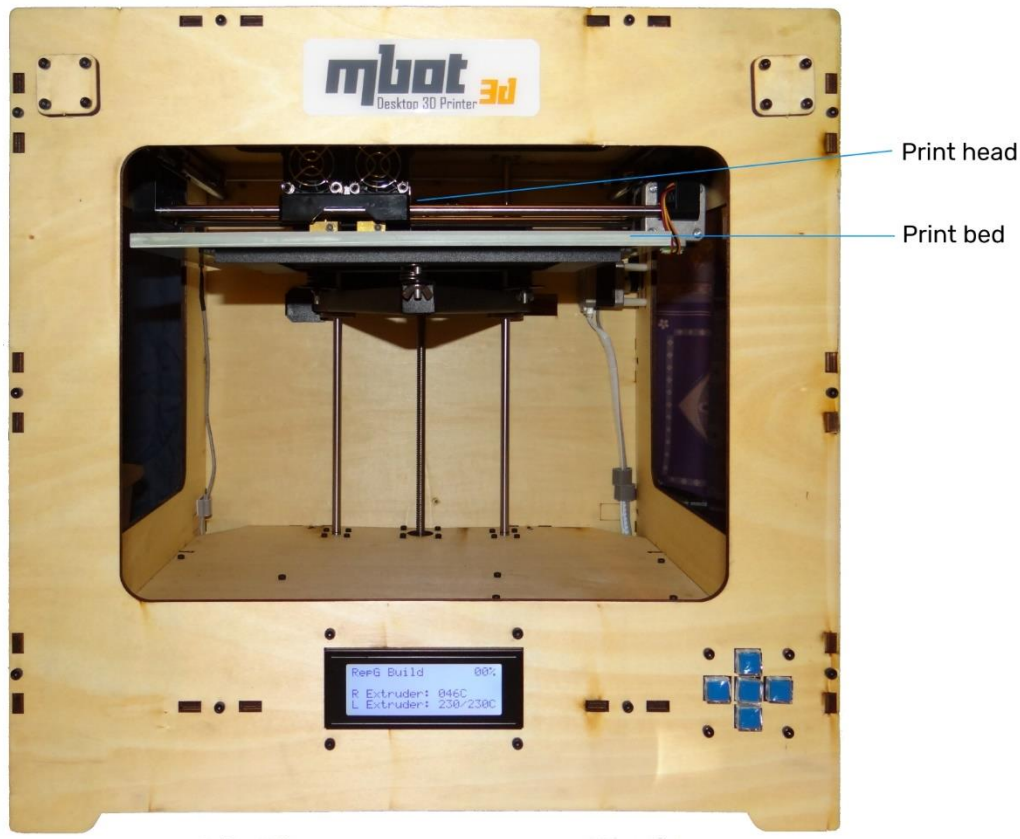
Important Components of the MBot Cube Duo 3D Printer
